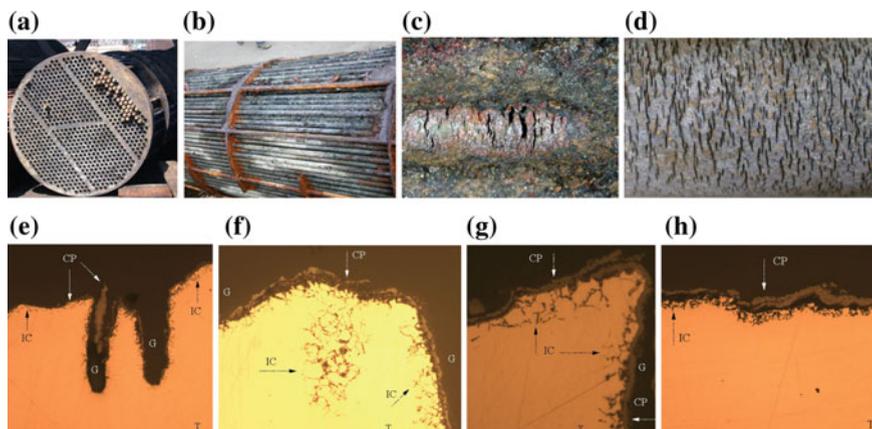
a The tube bundle with 60 clogged tubes. b Corroded Admiralty brass tubes (with deposits) and corroded carbon steel baffles. c, d Cracks, holes and grooves on tube surface. e–g Metallographic cross-section of grooves with different magnification (e: $\times 100$, f: $\times 200$, g: $\times 500$): IC—Intergranular corrosion (corrosive attack on grain boundaries), CP—corrosion products, G—grooves, T—tube. h Metallographic cross-section near the grooves ($\times 100$)
